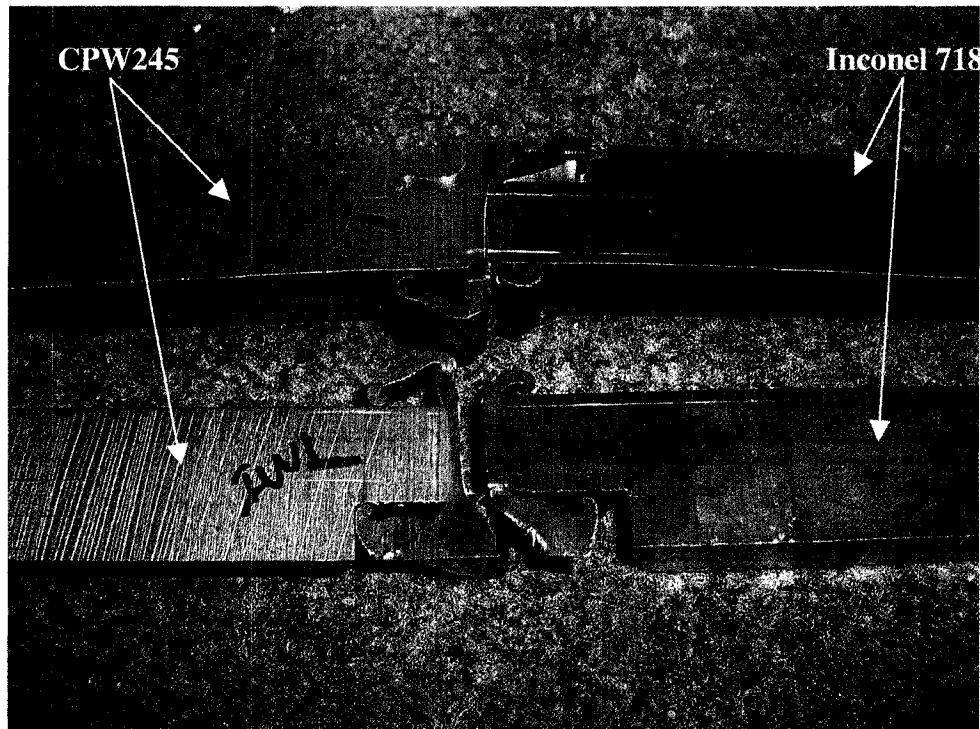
IW1 - Profile of the weld after tensile test
